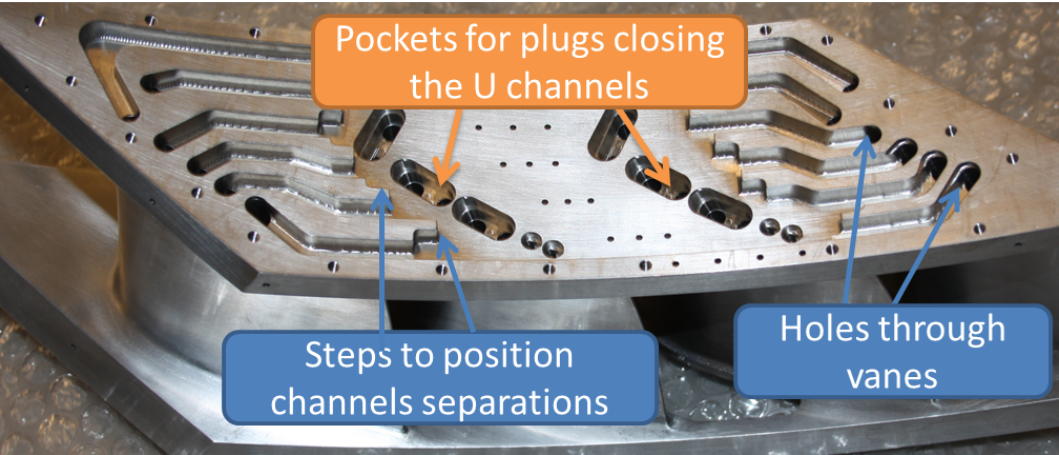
Picture of the channels through the hub platform before plugs and separations are assembled.
